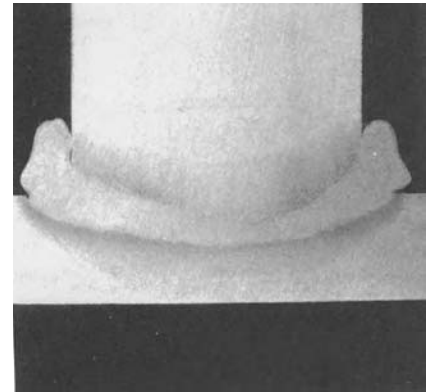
Macrosection of low-carbon steel stud weld
